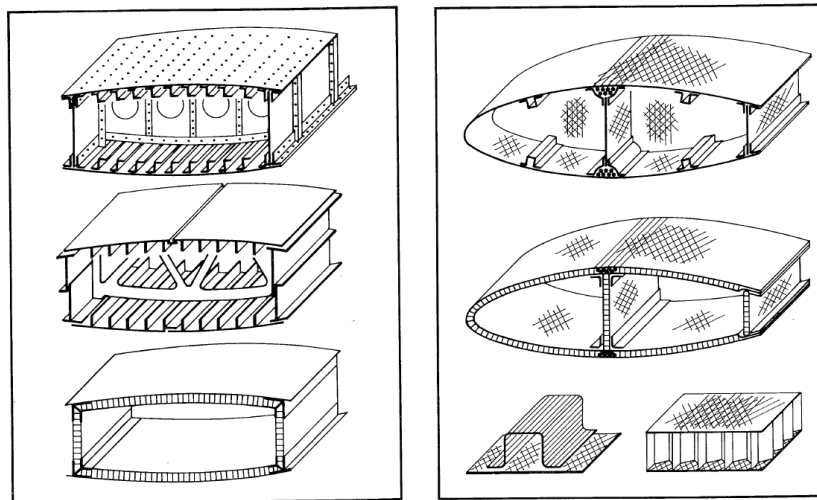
Lightweight construction (left: Differential-, Integral- and Sandwich-construction; right: Composite-construction) [89]
